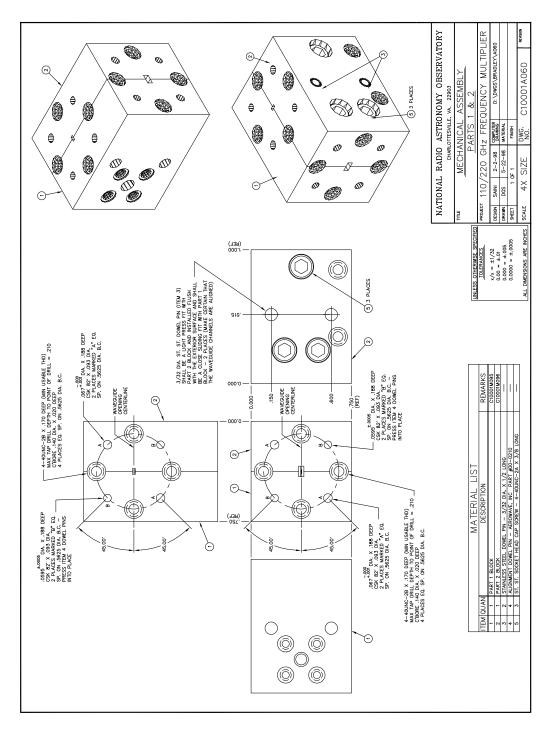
110/220 GHz frequency doubler: External mechanical assembly of parts 1 and 2 of the split block.
